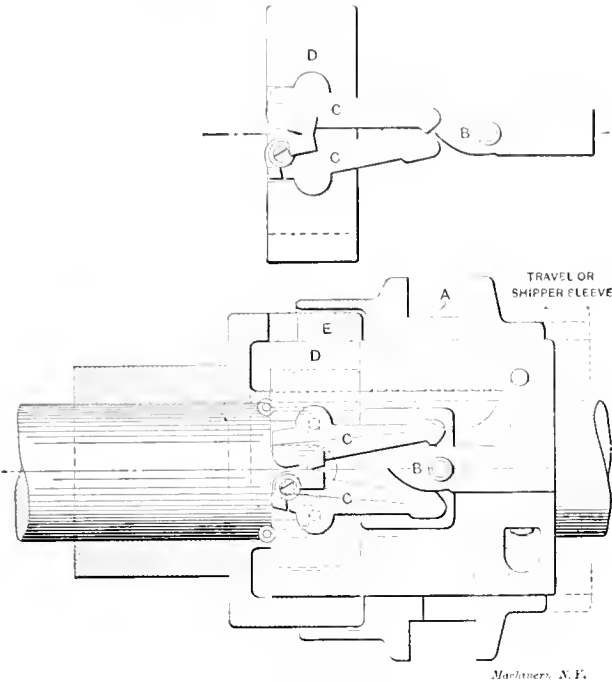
The Johnson Clutch, used largely on Machine Tools and on Counter-shafts.
